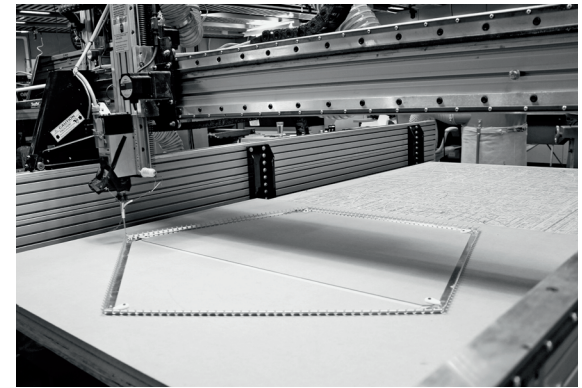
Three-axis CNC machine adapted as CNC deposition tool. Custom threading tool, temporary aluminium scaffolding and MDF jig.
